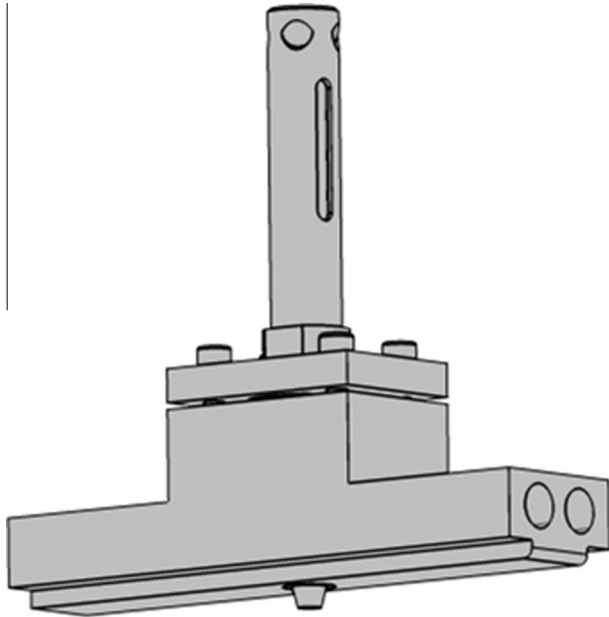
FSW tool with long stationary shoulder and conical threaded pin.
